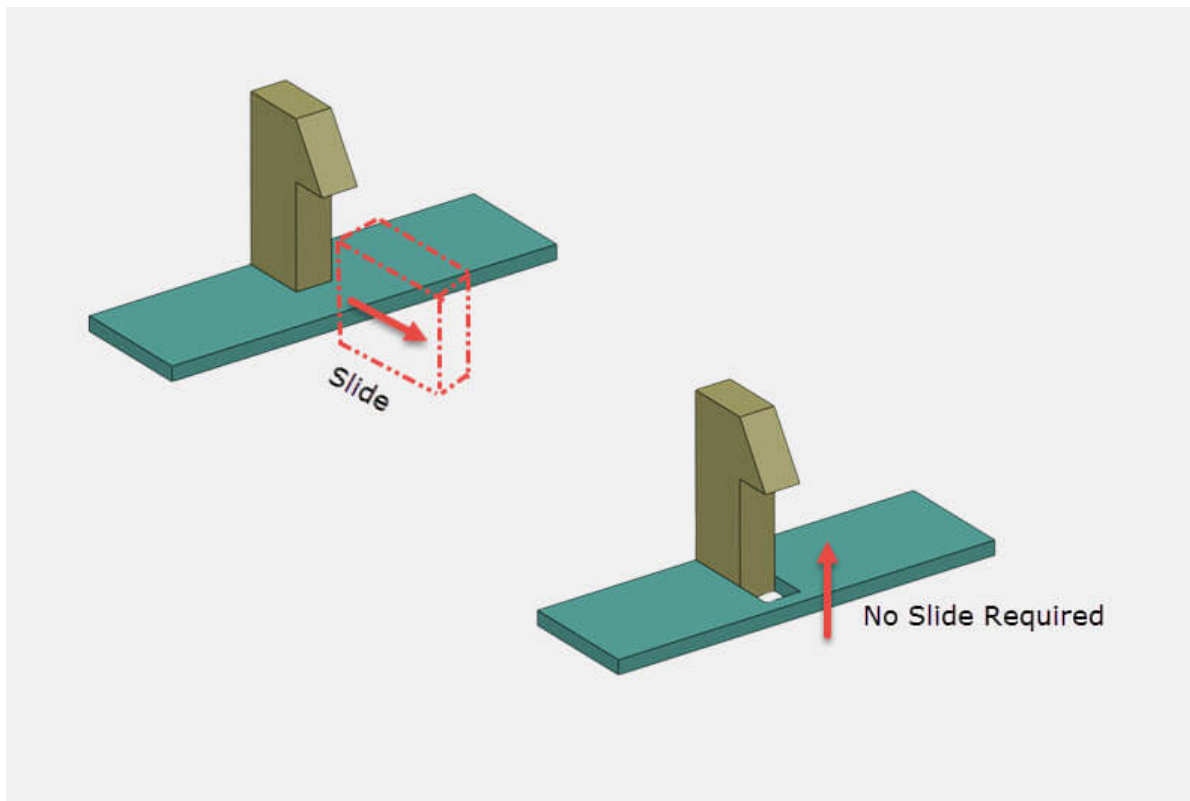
Illustration of a latch with simple pass-through coring [39]
